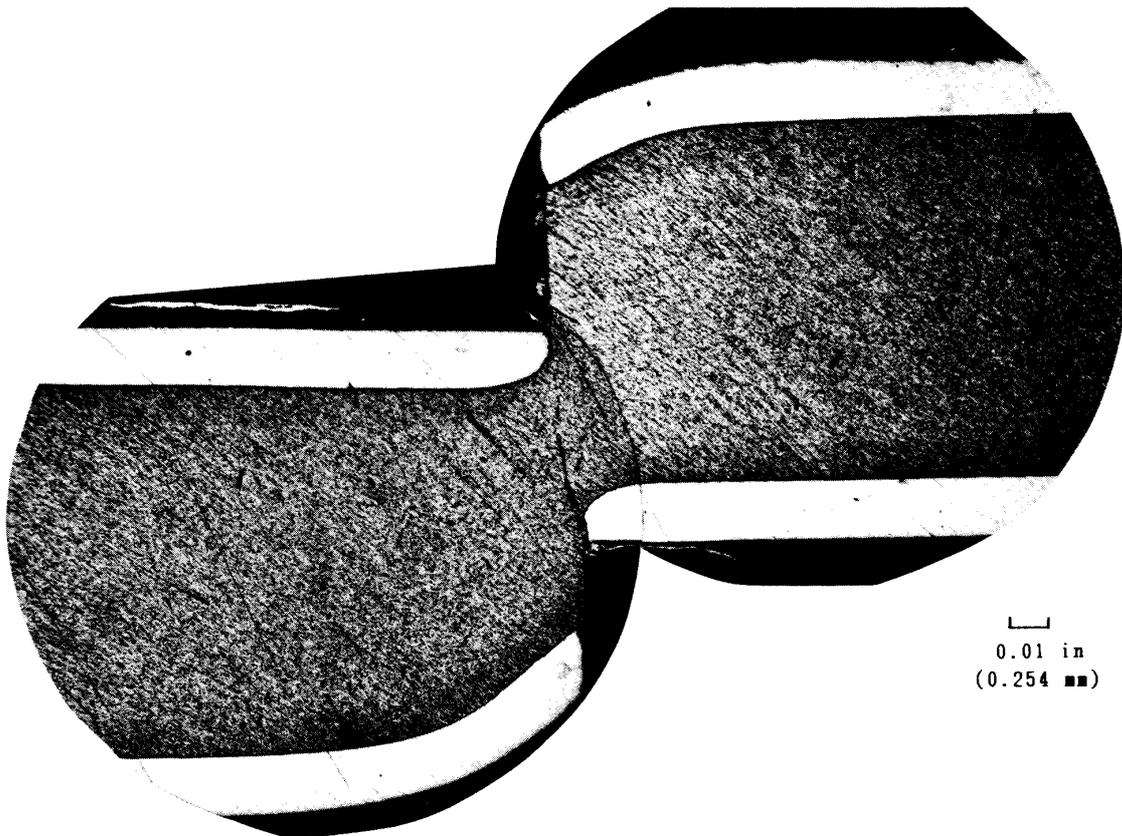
SS-clad Al Half-Way Specimen Section
